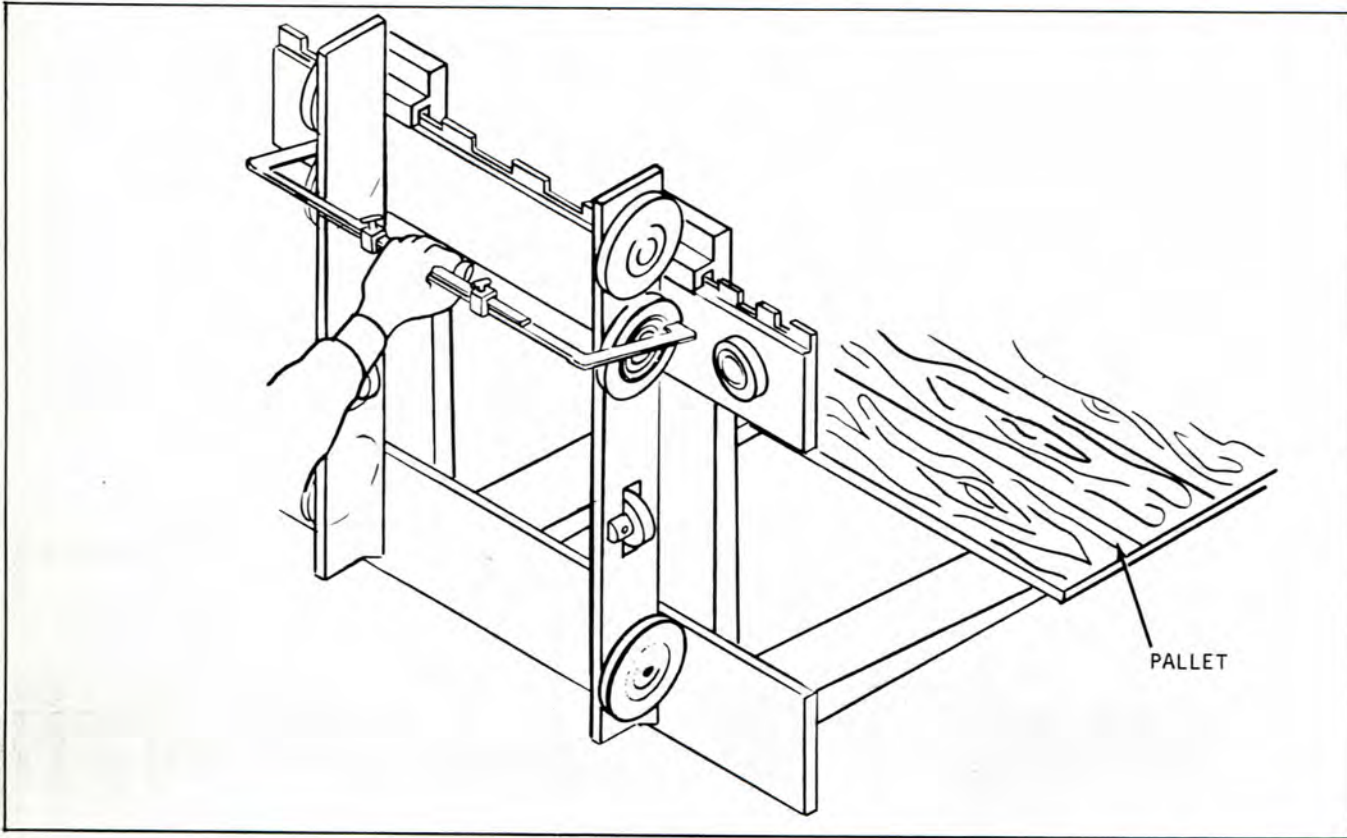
Spanning Upper Rollers (Six Roller Carriage)
